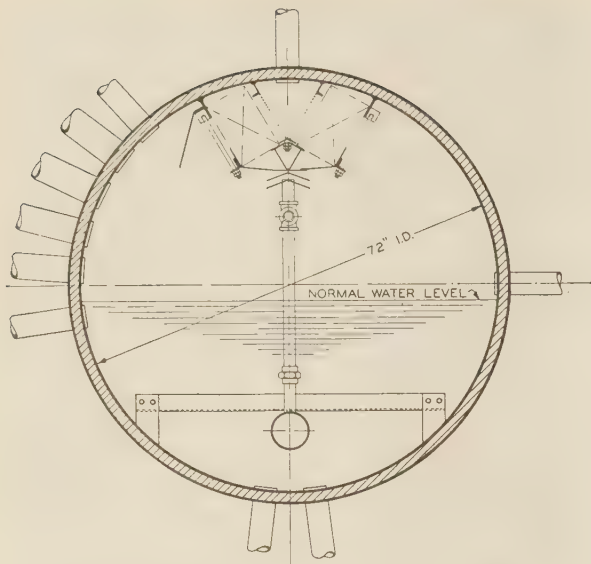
STEAM-AND-WATER DRUM OF BOILER
